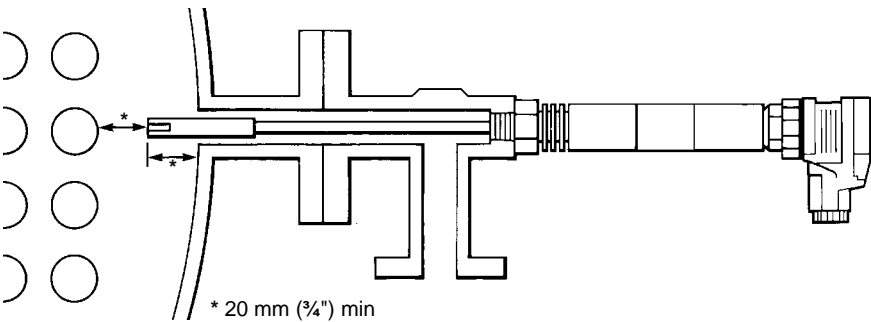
Typical installation showing probe mounted in probe elbow (3/8" BSP only)
